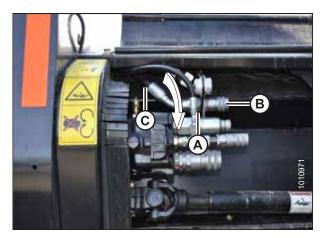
Auger and Reel Pressure Coupler and Hose – 4.9 m (16 ft.) Header Shown
